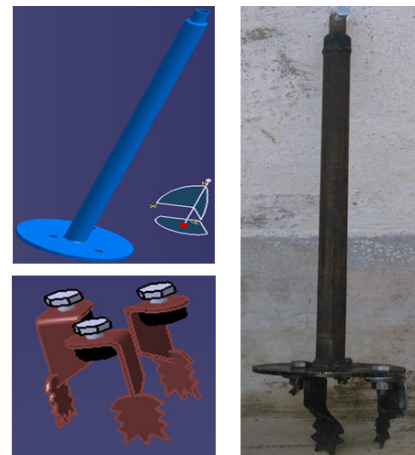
Intercultivator Tool CAD Model and Fabricated Tool.
